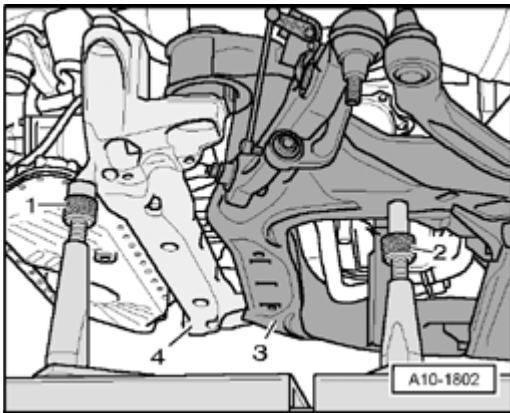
Identifying Subframe, Left/Right Of Engine Carrier & Support Elements
